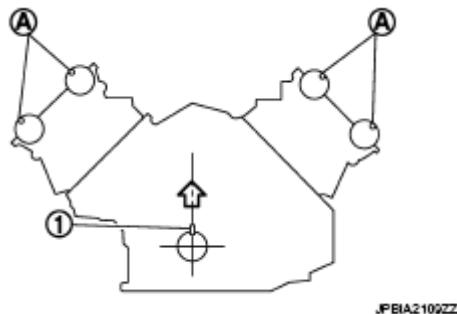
Identifying Crankshaft Key And Dowel Pin
